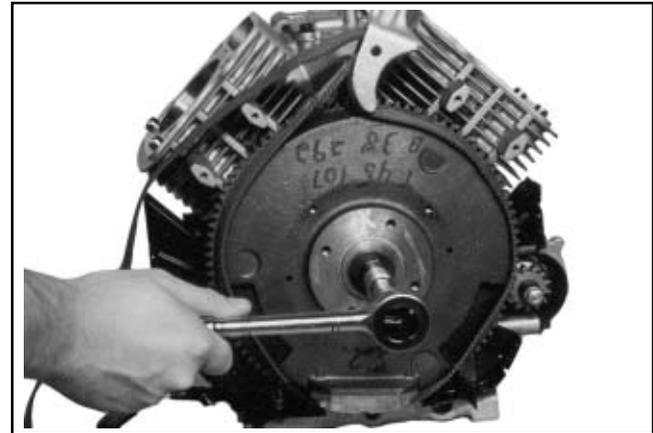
Removing Flywheel Fastener Using Strap Wrench.
